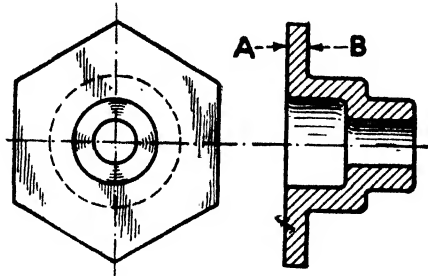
If, in this simple die casting, the parting is at face *A*, which has to be machined, the flash will be cut off in the process of machining. But if face *B* is made the parting, flash will have to be removed in a separate operation and will require either a special shaving die or much more time to machine.
